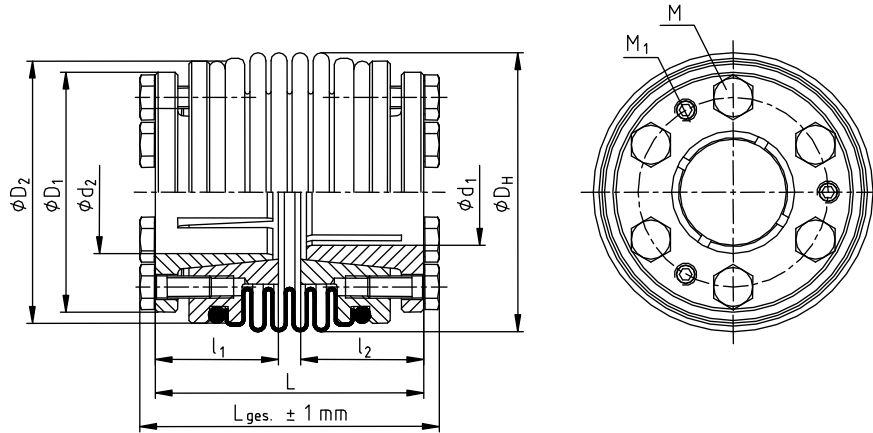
TOOLFLEX® type KN (type 6.5) – example of drawing: type S-KN
